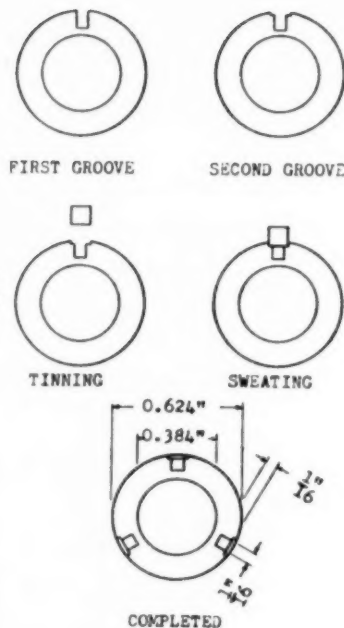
FABRICATION OF HEAT-TRANSFER SURFACE
